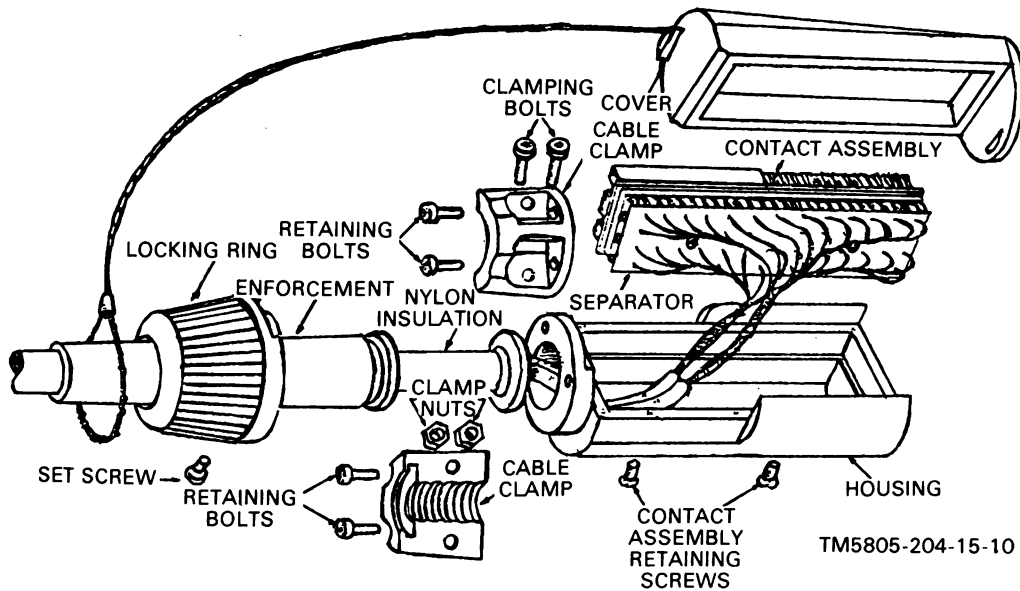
Twenty-Six Pair Cable Connector, Exploded View
